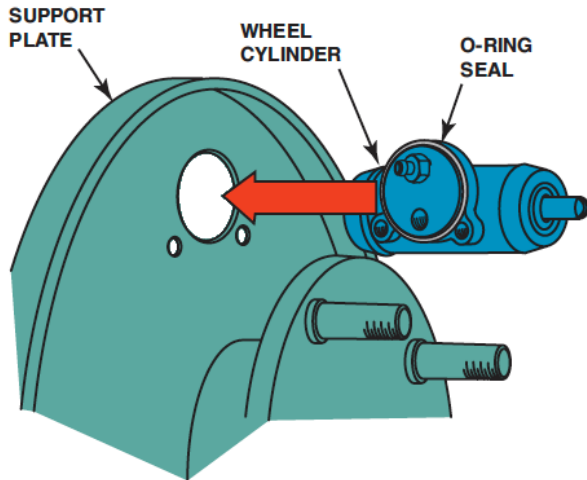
This wheel cylinder mounts to the backing plate with bolts.
